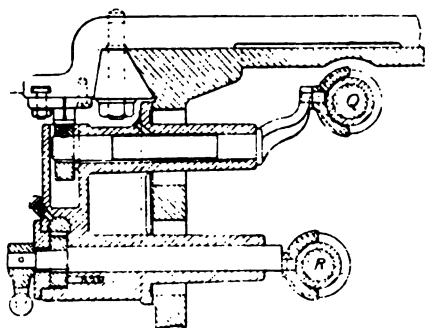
Trip Movement, B. & S. No. 5 Machine.
